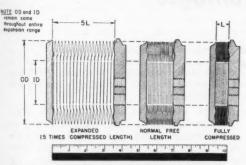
Cross-section of compressed and expanded positions of welded diaphragm nesting bellows
